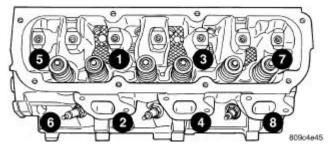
CYLINDER HEAD TIGHTENING SEQUENCE Courtesy of CHRYSLER LLC
